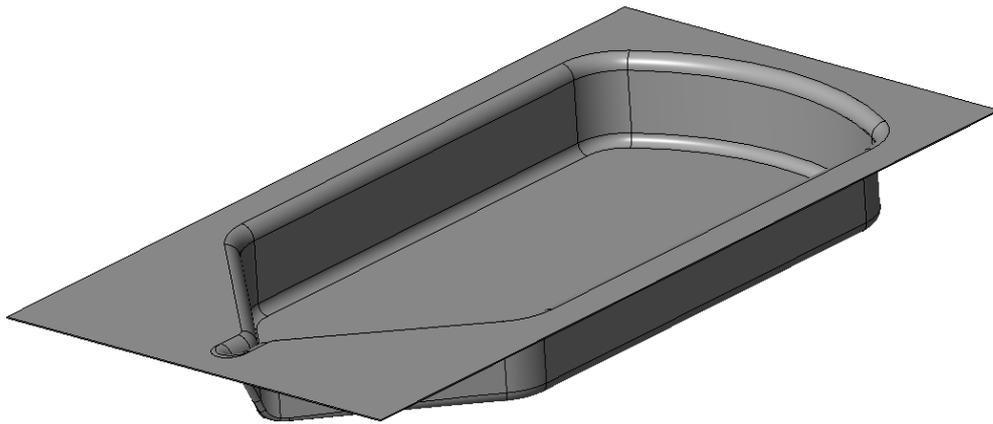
3D CAD model of molybdenum sheet shaped into the finally form
